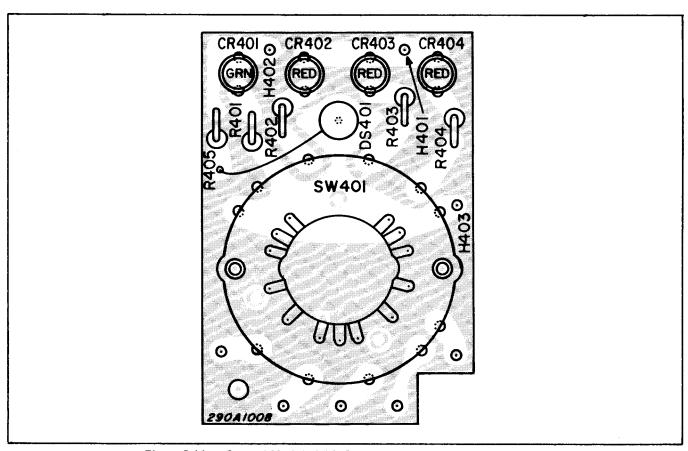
Control Module LED Circuit Board Parts Location Diagram.
